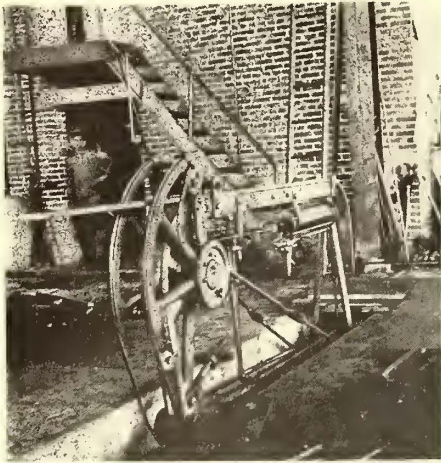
PNEUMATIC BENDING MACHINE FOR TRUCK FRAMES
